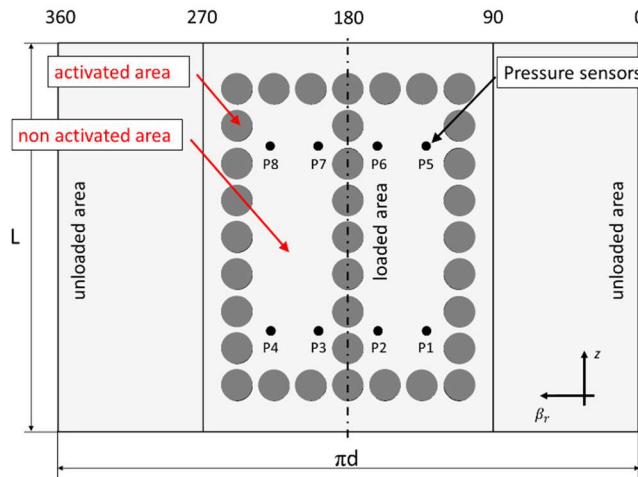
Unfolded journal bearing with magnetic buttons (grey circles) on bearing bush perimeter.
